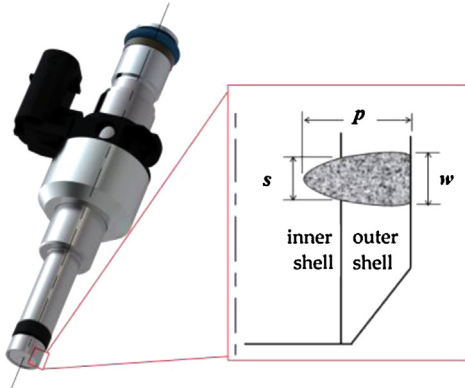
3D view of a fuel injector and weld characteristics: w , width; p , penetration depth; s , resistance length.
